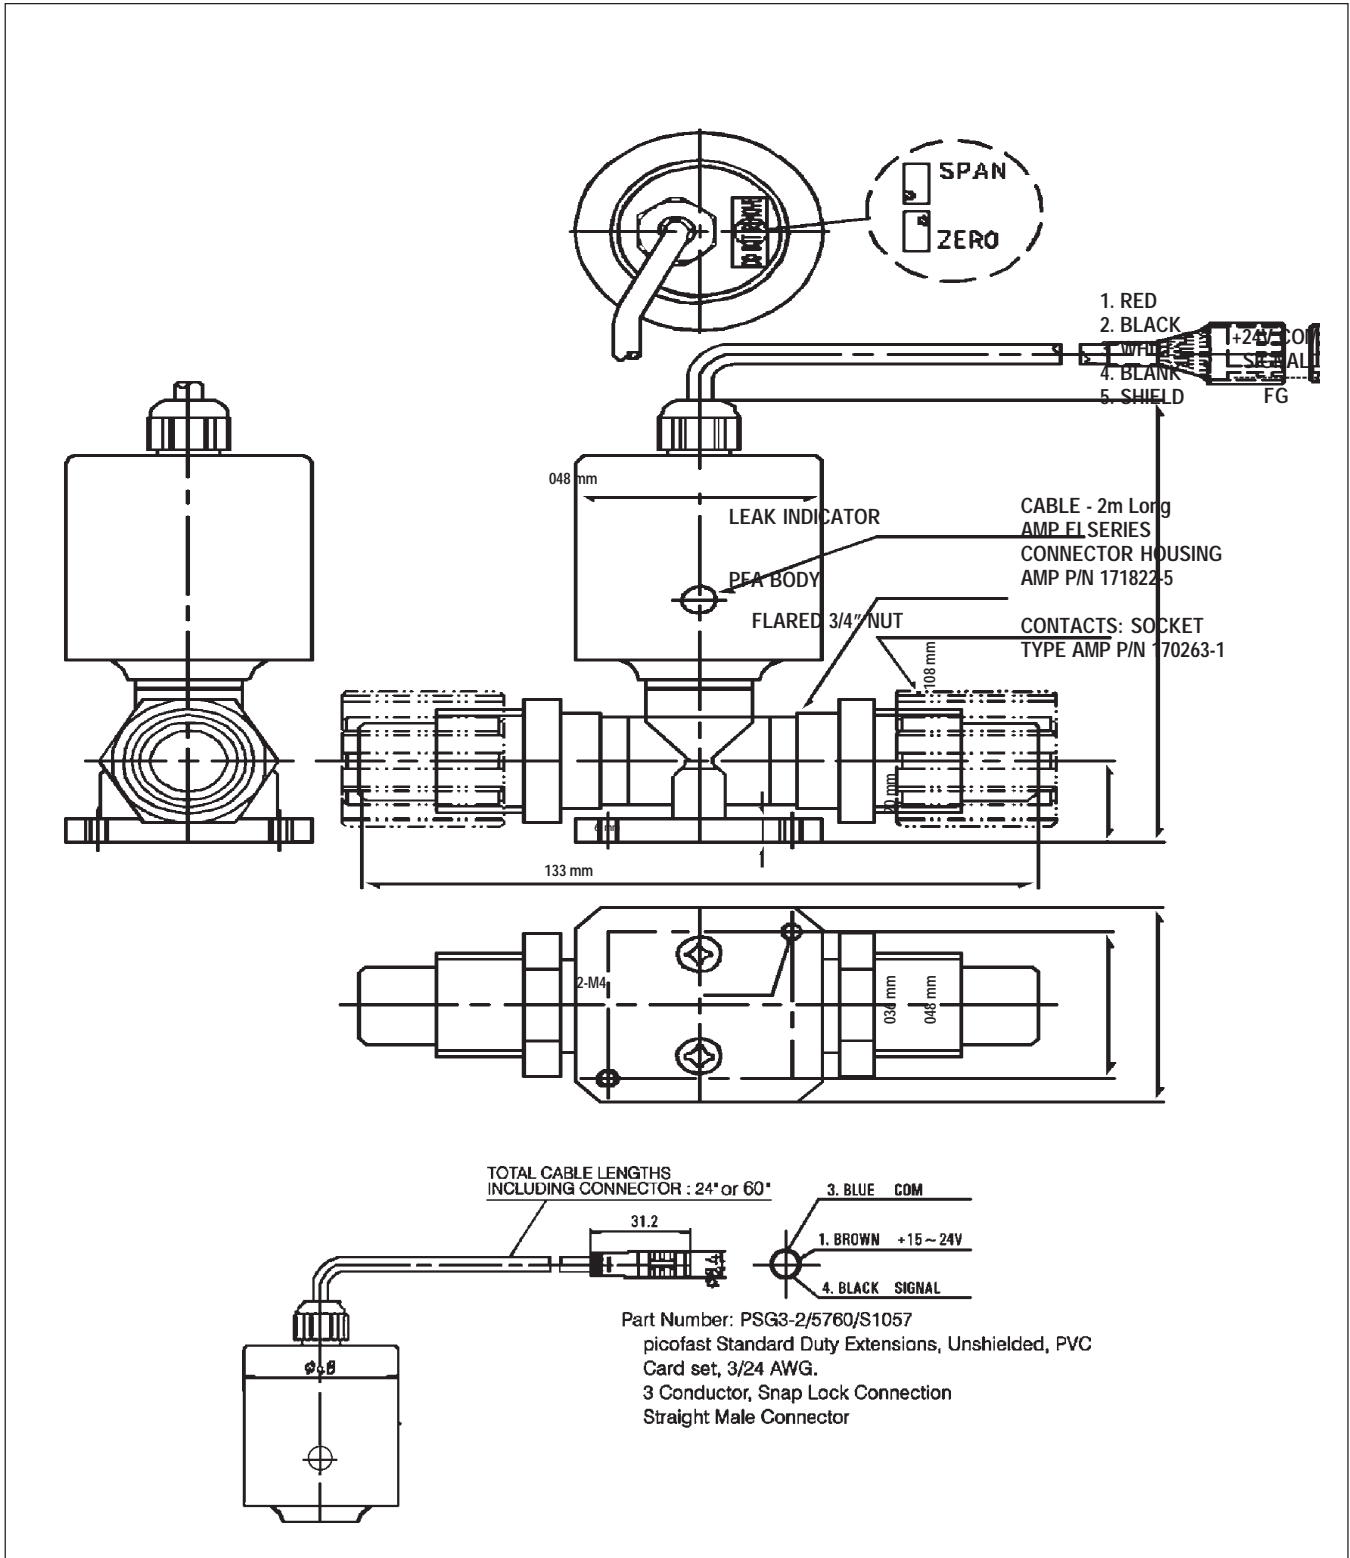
Dimensional Drawing of the Brooks® Model SFP33, Flow-Through Pressure Transmitter with 3/4" Flare Process Connection. The AMP and Turck Electrical Connector Options are Shown.
